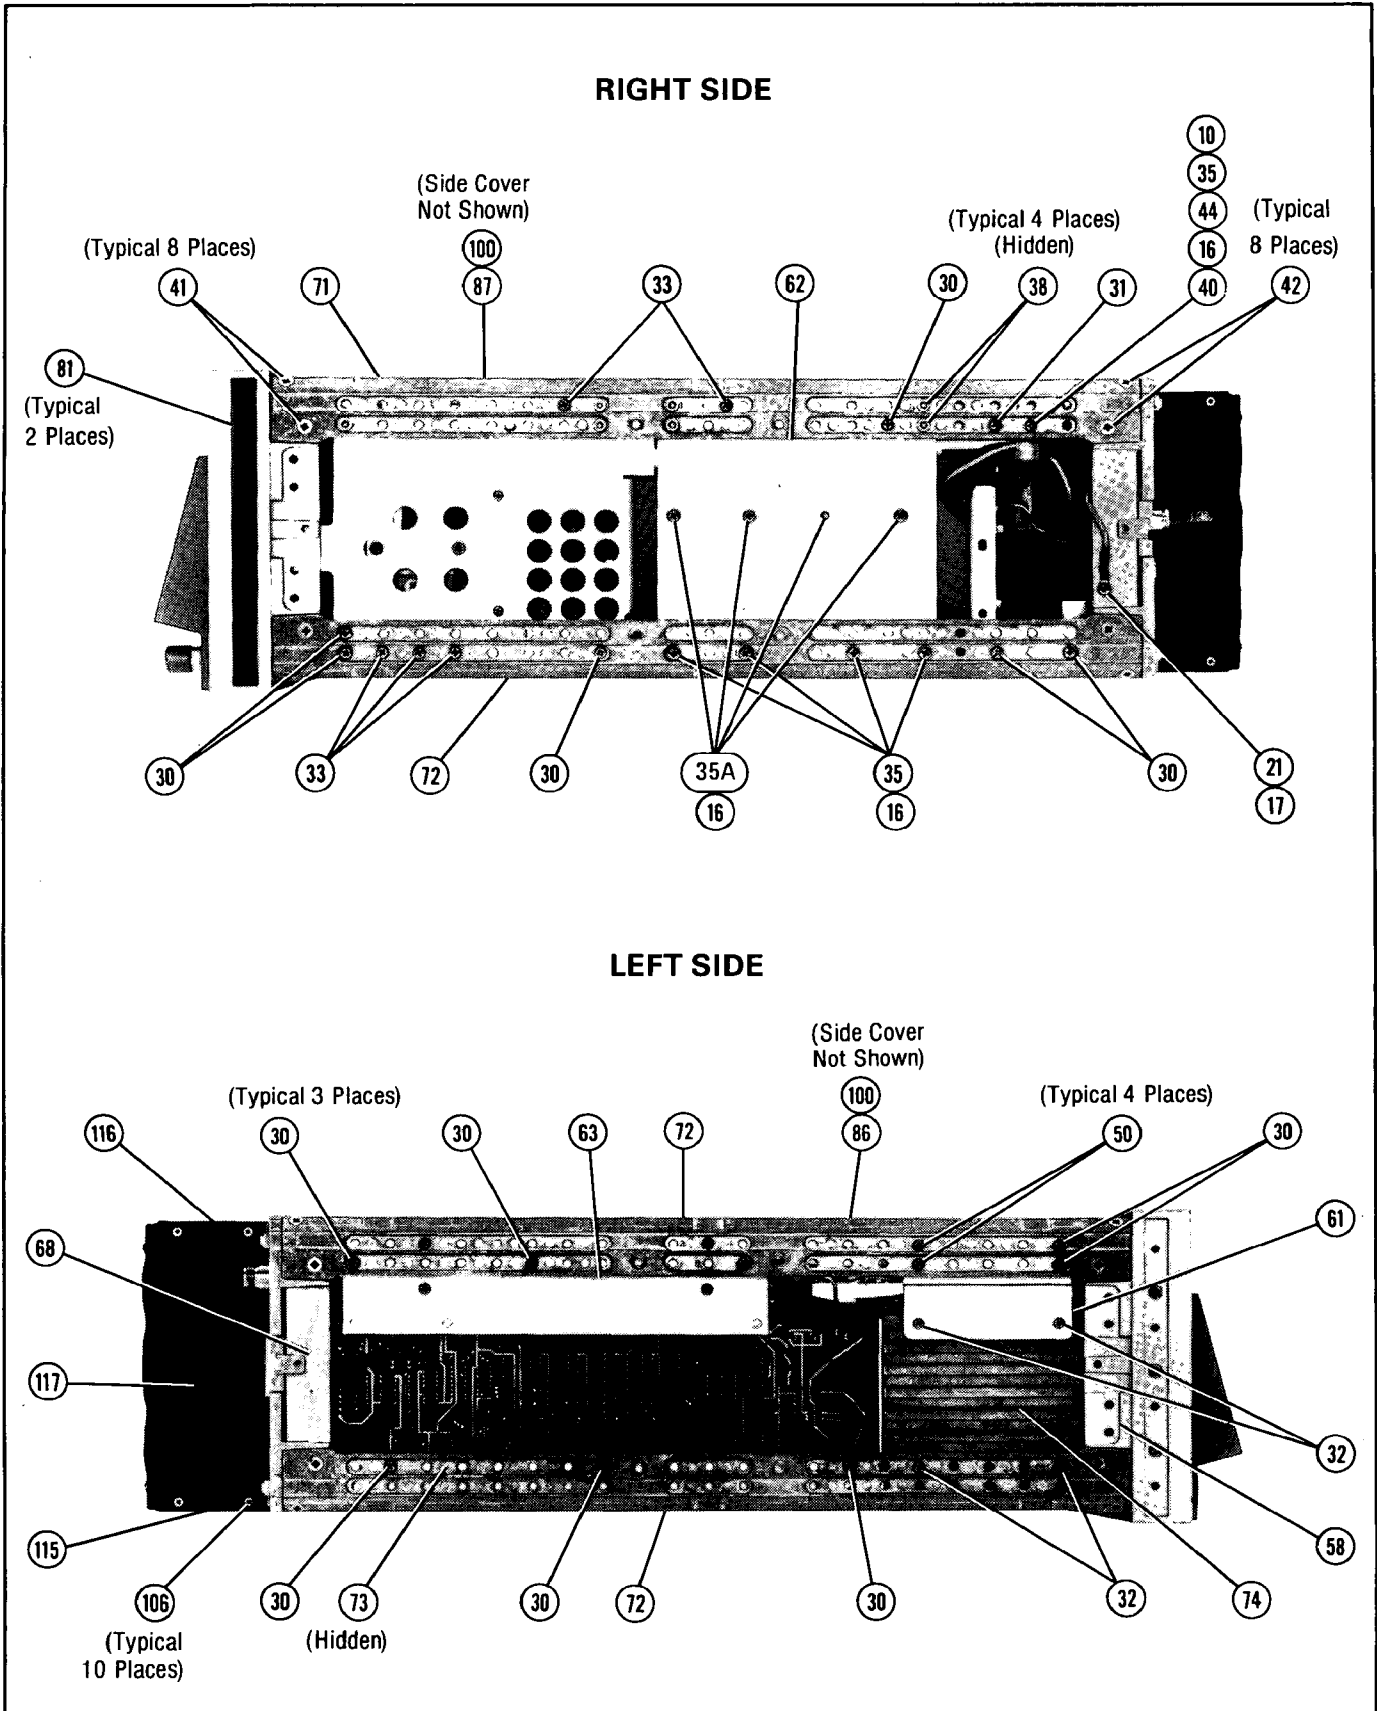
Miscellaneous Mechanical & Chassis Parts (8 of 9)
